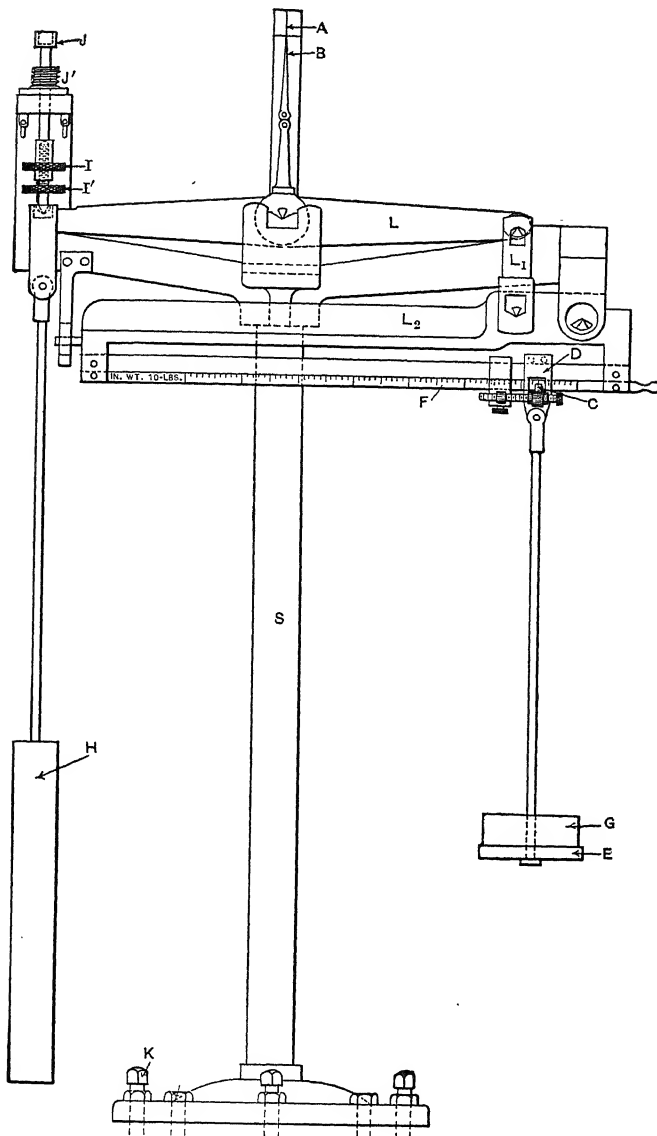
CALKINS INDICATOR-SPRING TESTING APPARATUS.
